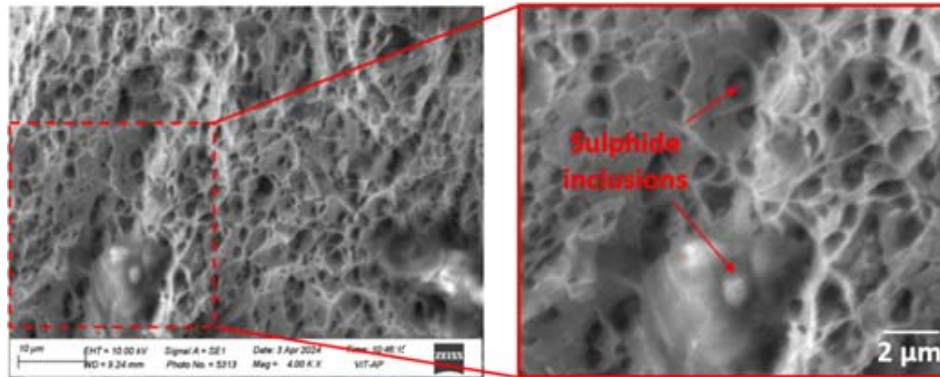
Fractography of Inconel 718 and AISI 410 dissimilar joints
